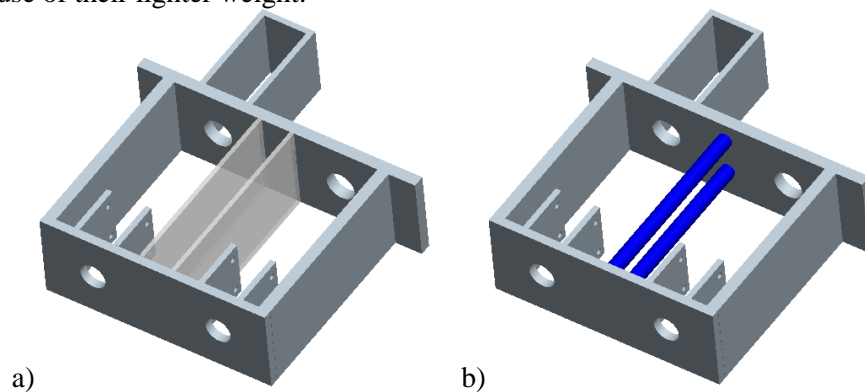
a) Removal of plate. b) Addition of plate.
